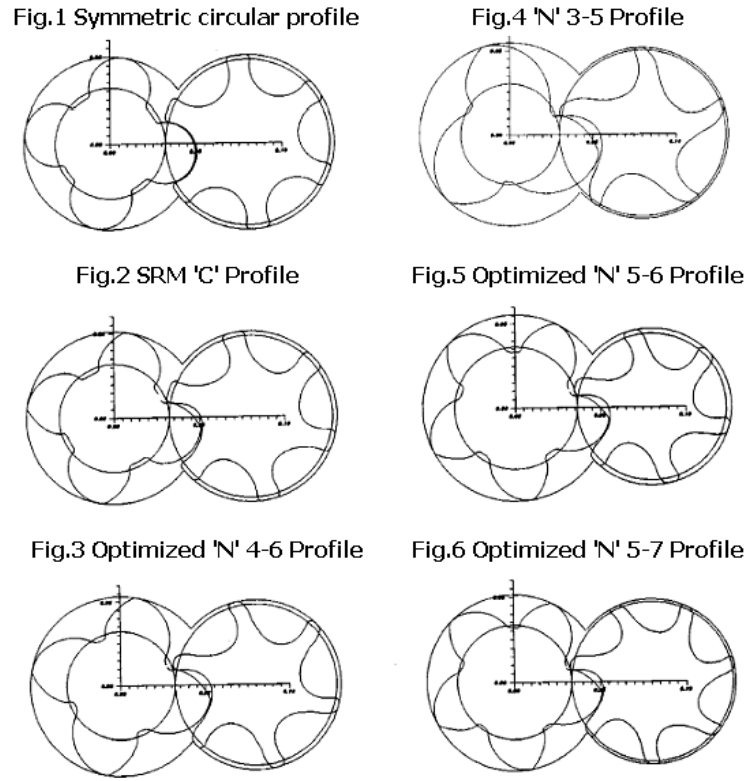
Optimized Screw Rotor Profile Designs [22]
